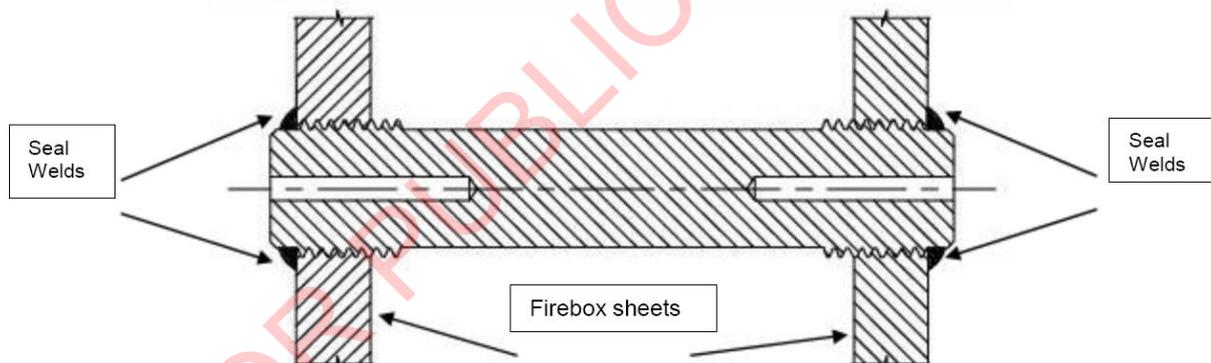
Cross-sectional view of a typical seal welded stay
